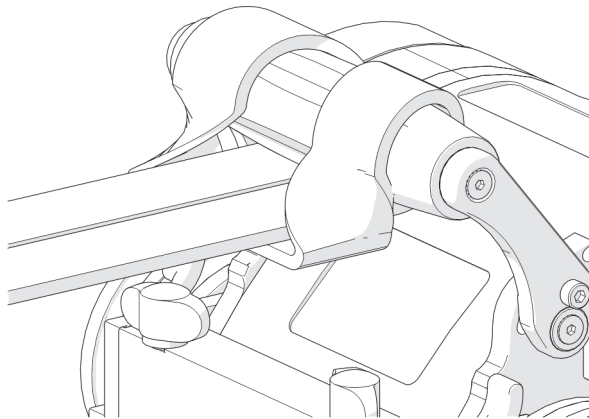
Attach the lifting sling with a choker hold knot (closeup view)
